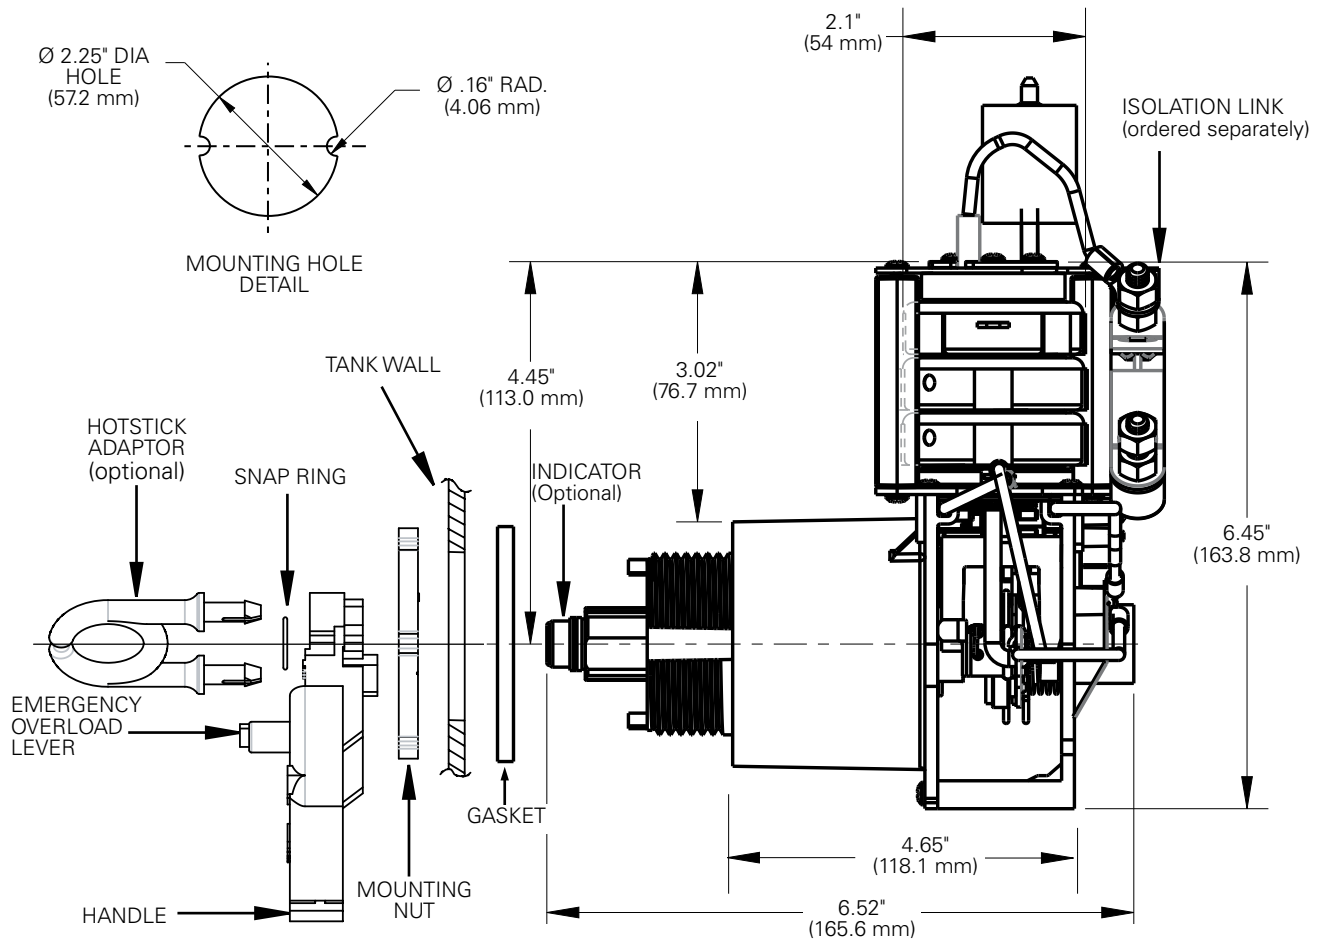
Side view with optional hotstick adaptor, handle and mounting hole detail.
